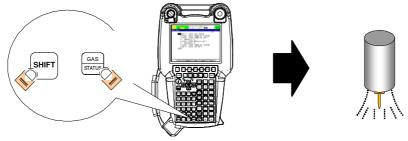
(a) Gas Check by Gas Purge Key Operation
